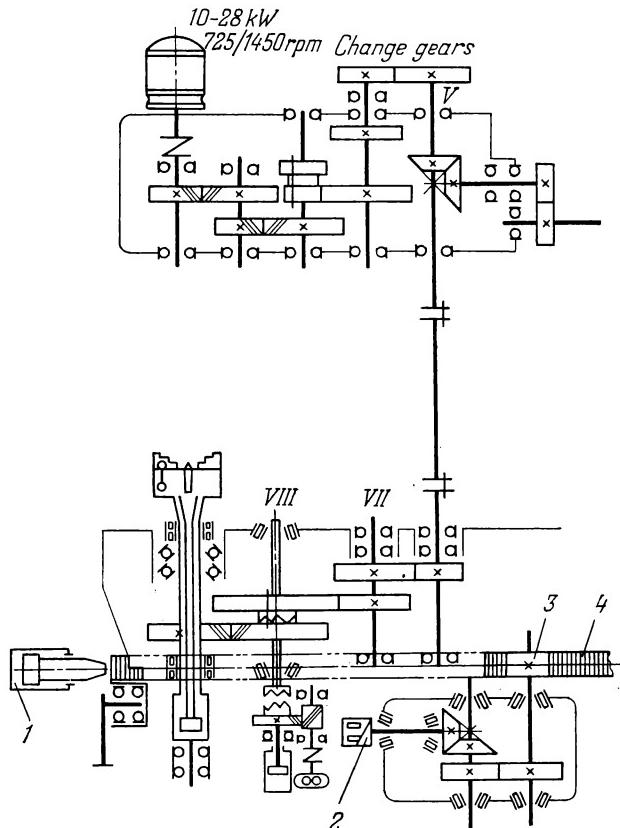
Kinematic diagram of the spindle drive in the model 1272 semiautomatic six-spindle vertical chucking machine
